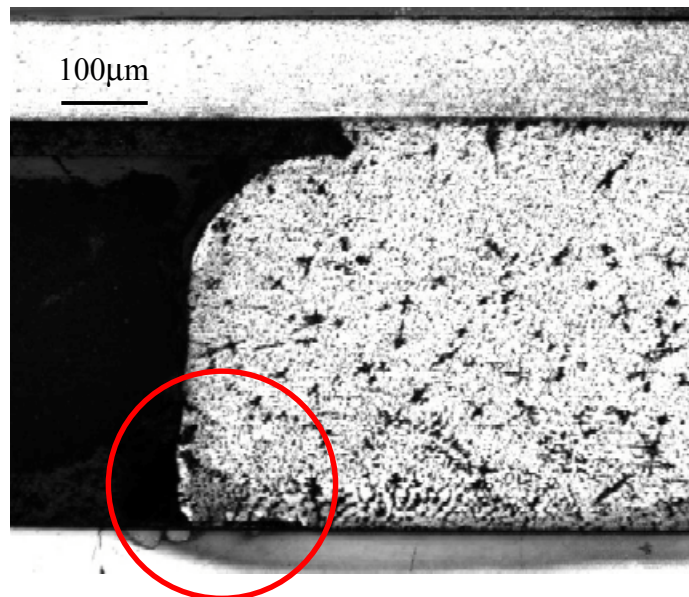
A typical CCB solder joint after 4,000 power cycles.
